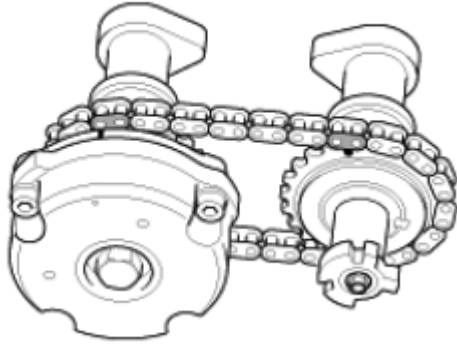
Identifying Intake Timing Chain Sprocket And Exhaust Timing Chain Sprocket
